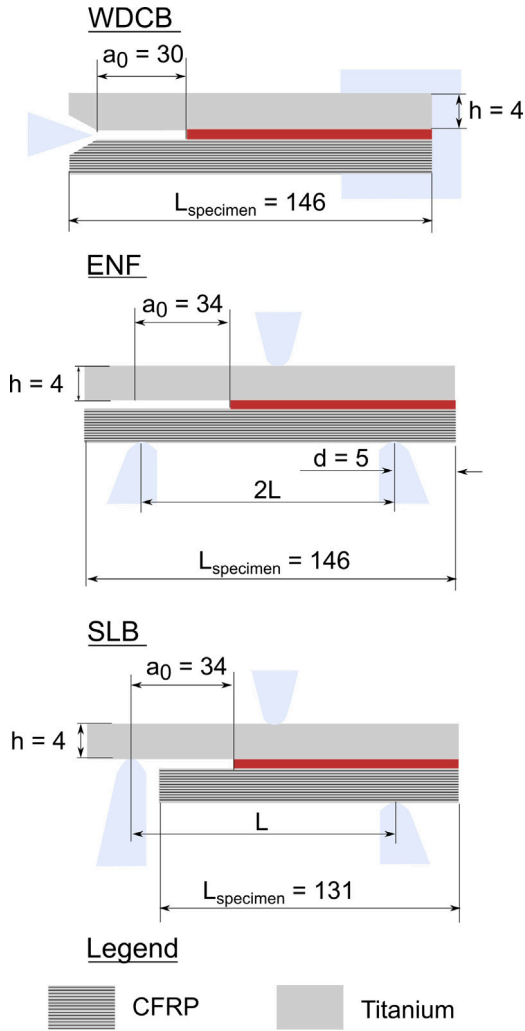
Specimen dimensions for each fracture mode configuration in [mm].
